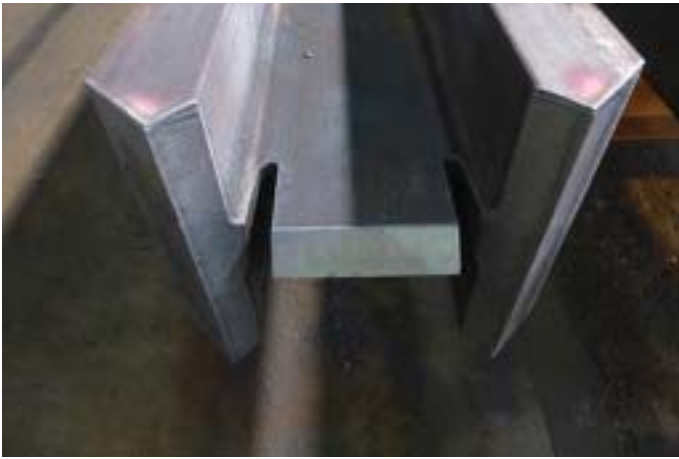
CJP butt weld preparation for Jumbo column
